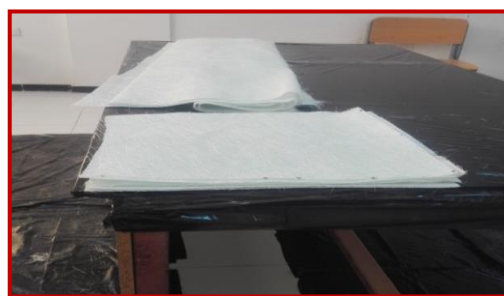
b Photograph of cutting the Copped/E-glass fiber to limited dimension
